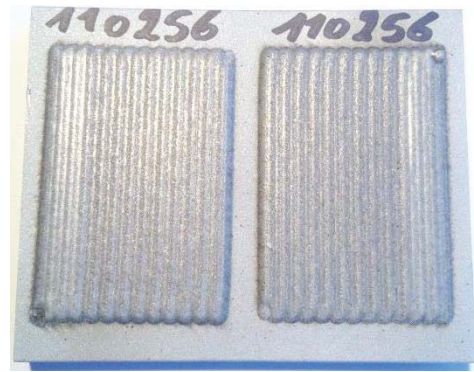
Laser surface cladded specimen with overlapping tracks.
